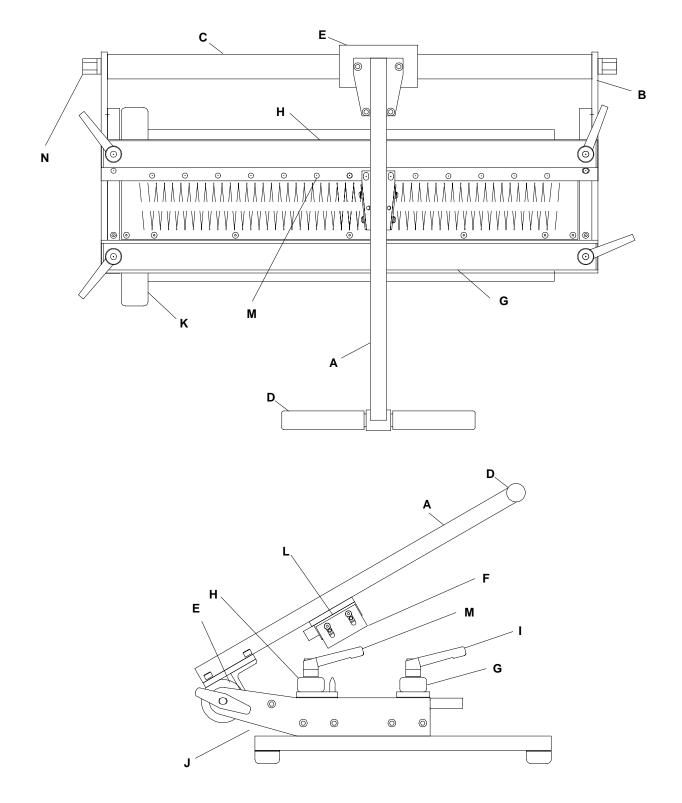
Cutter (Top View) Showing Handle Side as Operator Side & (Bottom View) Showing End View from Left Side
